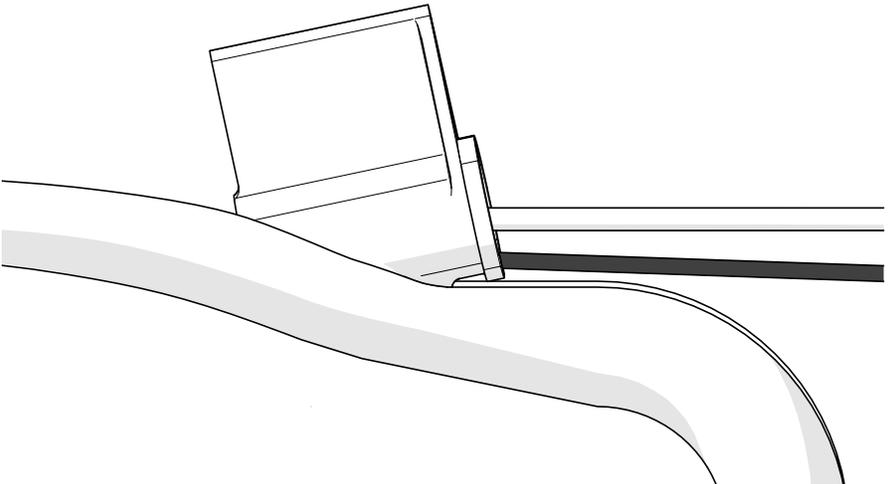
Wrap sleeving around cables and tubes using loom installation tool
